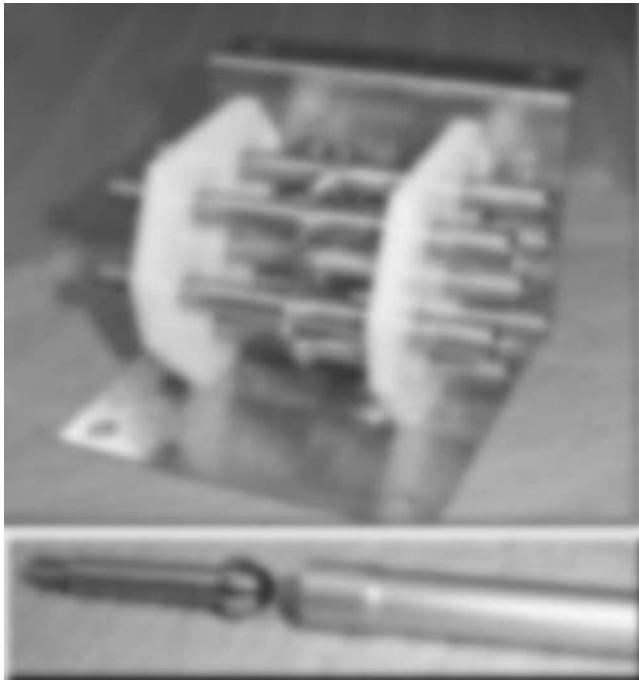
Top: Specimen (single fin and seven tubes). Bottom: Mechanical expansion bullet and tube.
